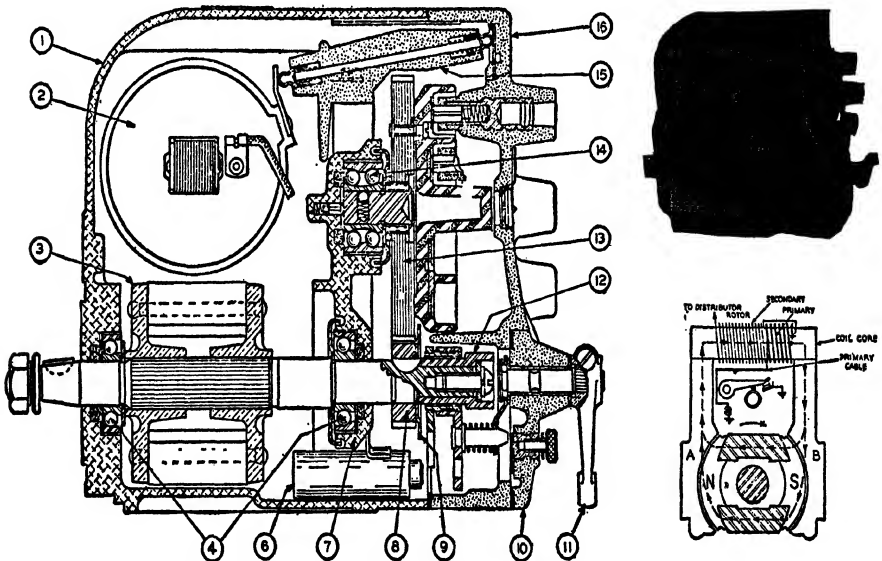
High tension ignition magneto. 1. Frame. 2. Coil. 3. Rotor. 6. Condenser. 8, 13. Gears. 11. Advance lever. 12. Breaker cam. 15. High tension lead. 16. Distributor case. (Courtesy American Bosch Corp.)
